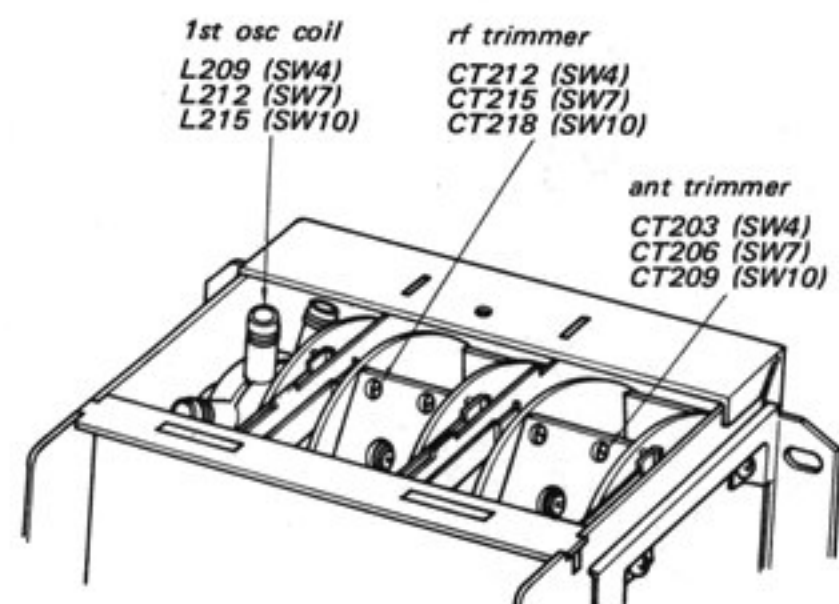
Adjusting parts for SW4, SW7, SW10
